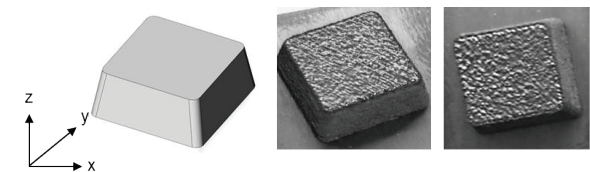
Laser melted indexable insert prototypes using WC-Co 88-12
